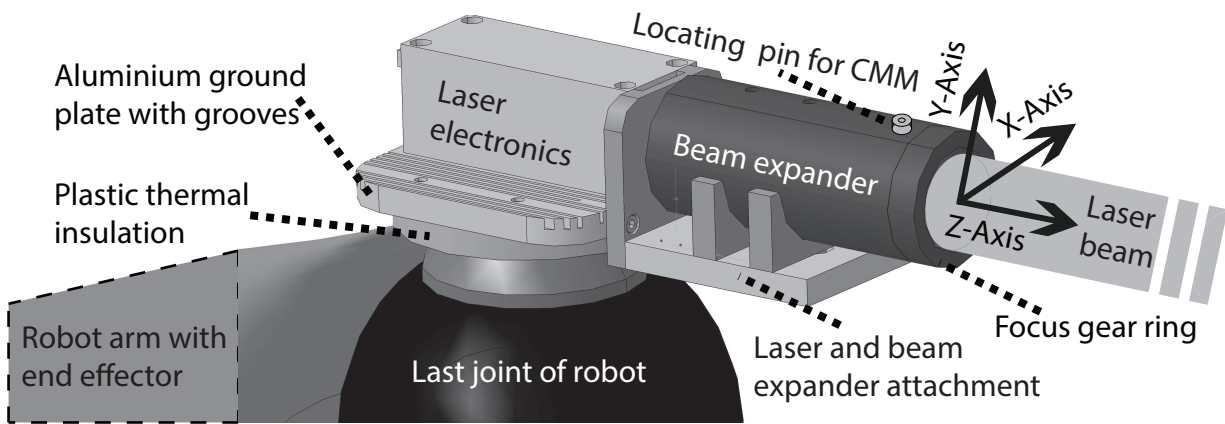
Laser and beam expander attachment mounted on the end effector of the KUKA LWR. Laser beam, focus gear ring of the beam expander, CS of laser and basic construction parts are indicated.
